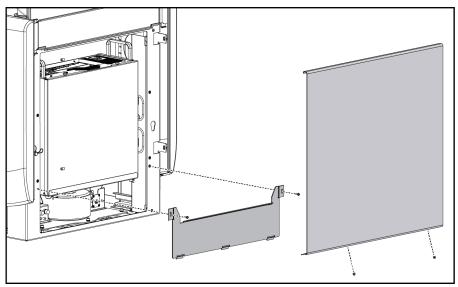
Removing rear cover (right) in order to remove lower rear panel kick plate (center)
